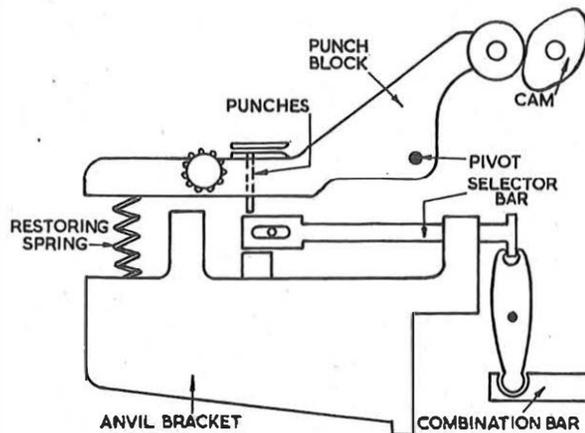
PERFORATING MECHANISM OF PERFORATOR No. 45.
